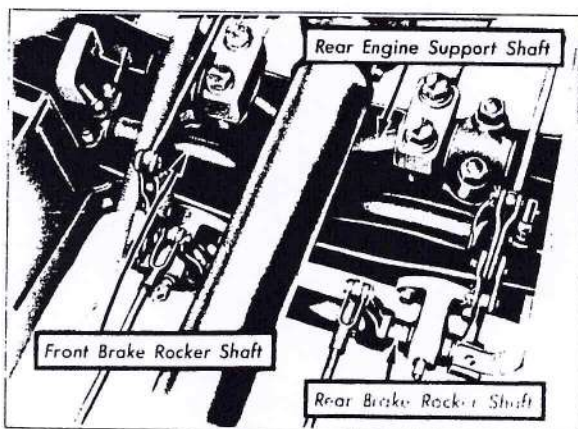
The 355 brake rocker shafts are arranged as on the V-16.
